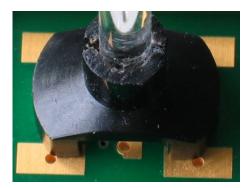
Photograph of the Mechanical Setup including the Light Guide (Mentor 1216.1003)
